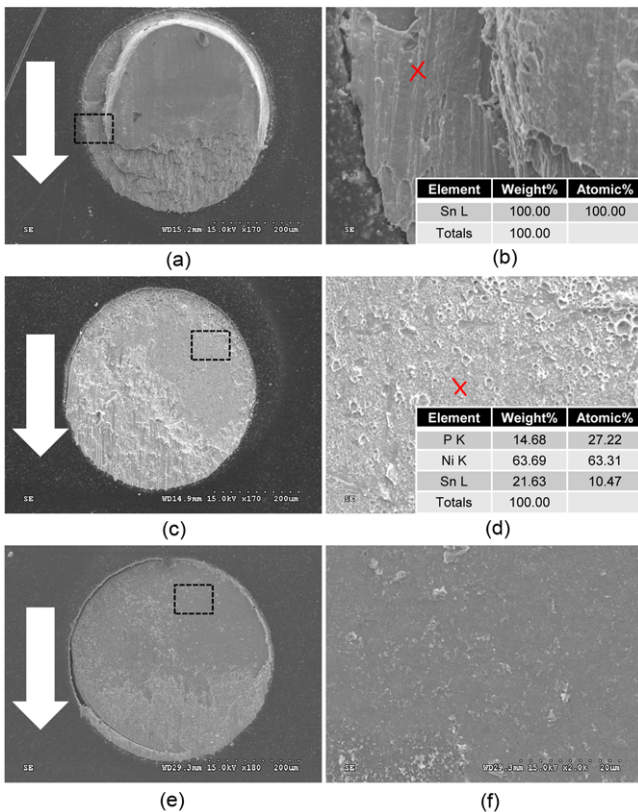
Fracture surfaces of the Sn-3.5Ag BGA solder joints after high-speed shear testing under various shear speeds: (a) and (b) 0.01 m/s; (c) and (d) 0.1 m/s; (e) and (f) 1 m/s.
